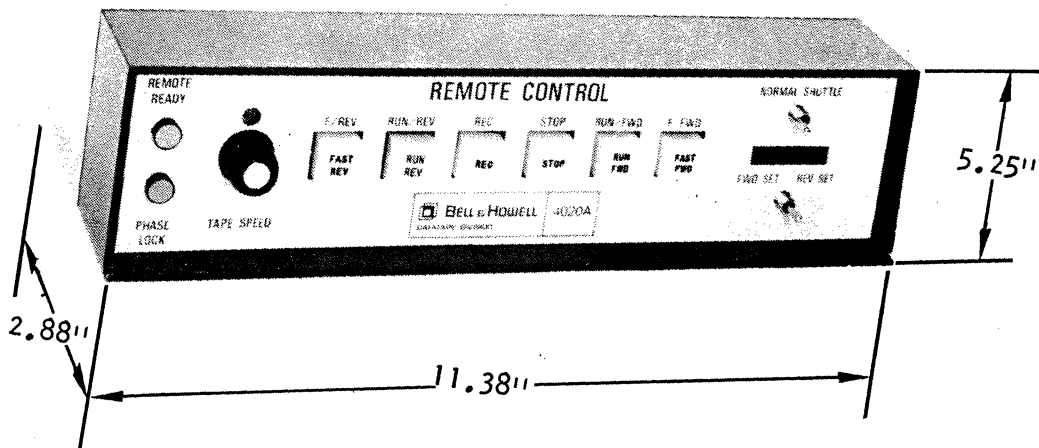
Outline Dimensions, 547401 Remote Control Assembly
